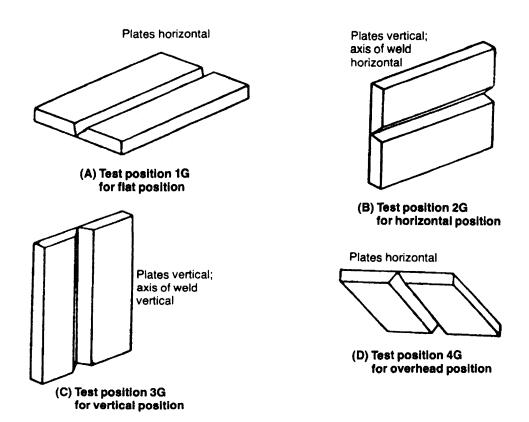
Positions of test plates for groove welds
